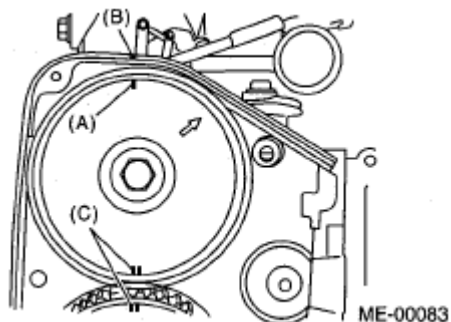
Identifying Mark On Intake Cam Sprocket (RH) And Timing Belt Cover
